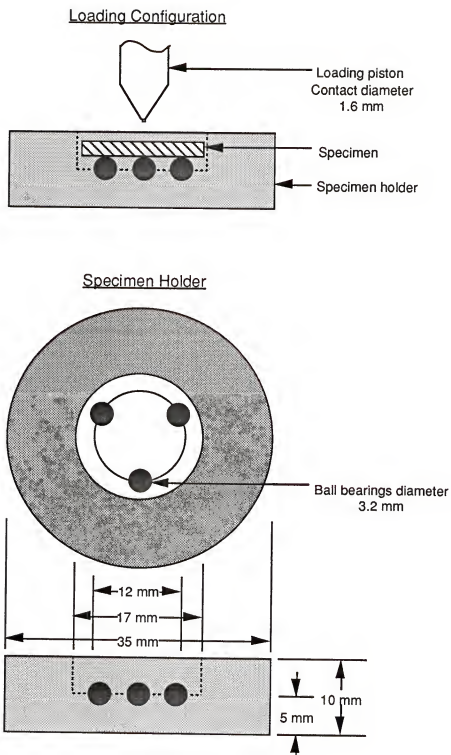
Piston-on-three-ball biaxial flexure fixture.
